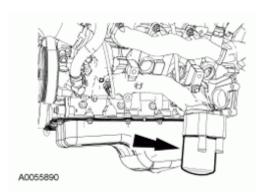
Locating Oil Filter Courtesy of FORD MOTOR CO.
